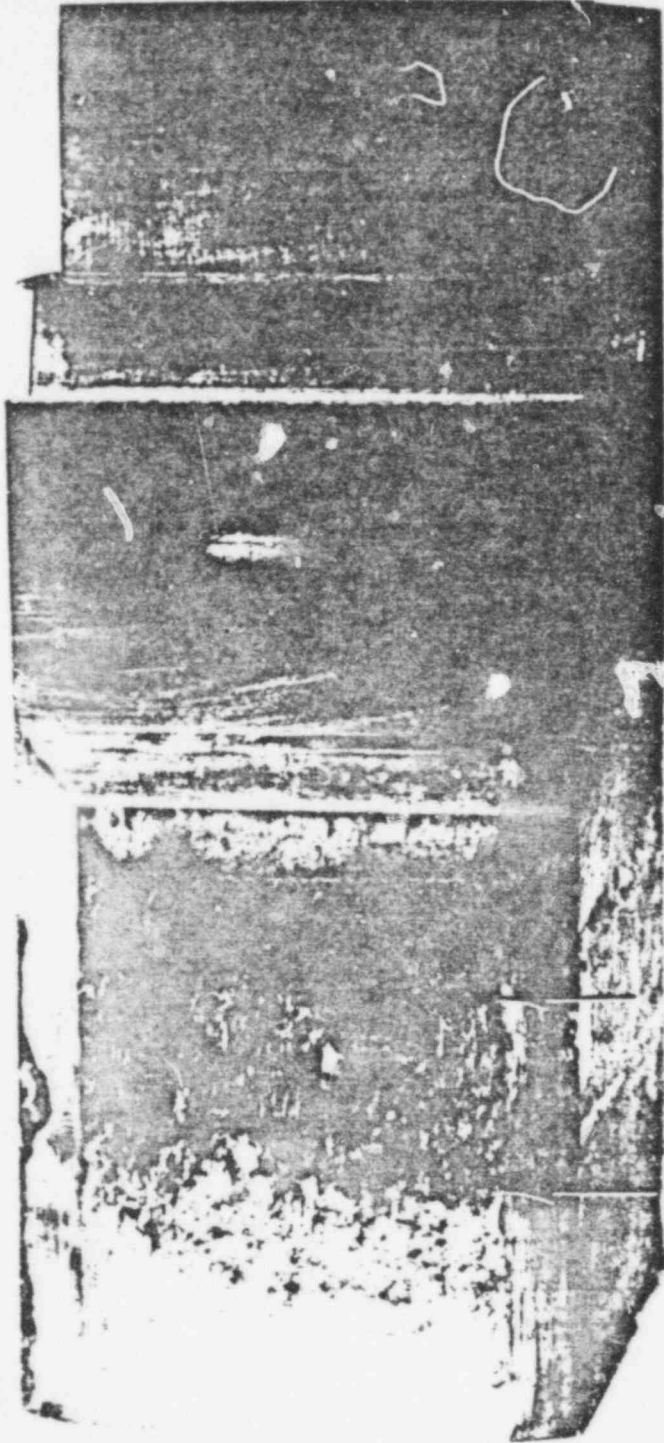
Fracture surface of a specimen which has been face-grooved. This specimen illustrates the crack front shape at two points in the loading history (indicated by arrows). Face grooving effectively eliminates the crack front curvature that was illustrated in Fig. 2.
